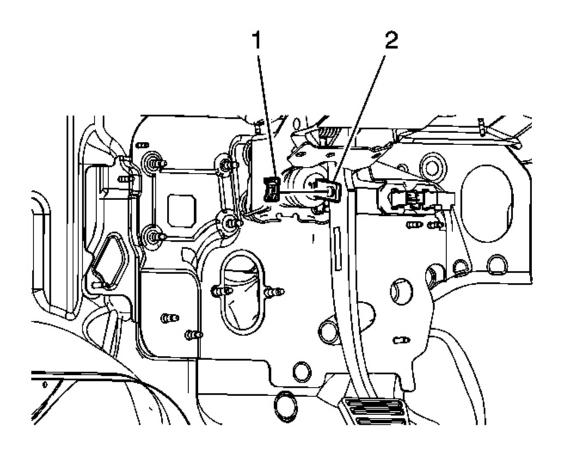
View Of Retainer & Clevis Pin Courtesy of GENERAL MOTORS CORP.
